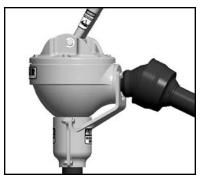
AUGER ADAPTER GUARD INSTALLED
